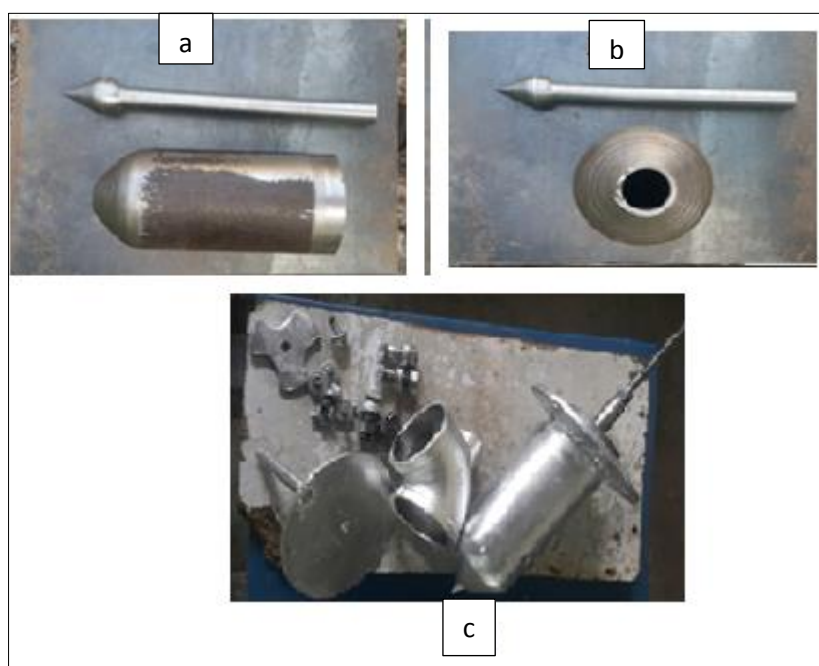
a) Side view of nozzle and spear b) Front view of the nozzle and c) Different parts of the nozzle assembly.
